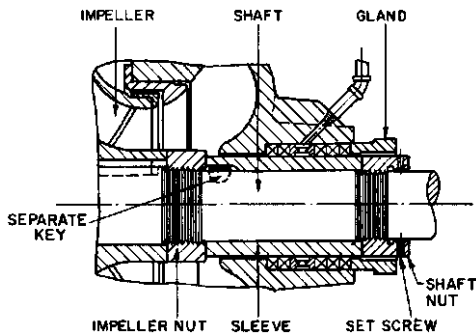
A sleeve with an internal impeller nut, external shaft-sleeve nut, and a separate key for the sleeve
